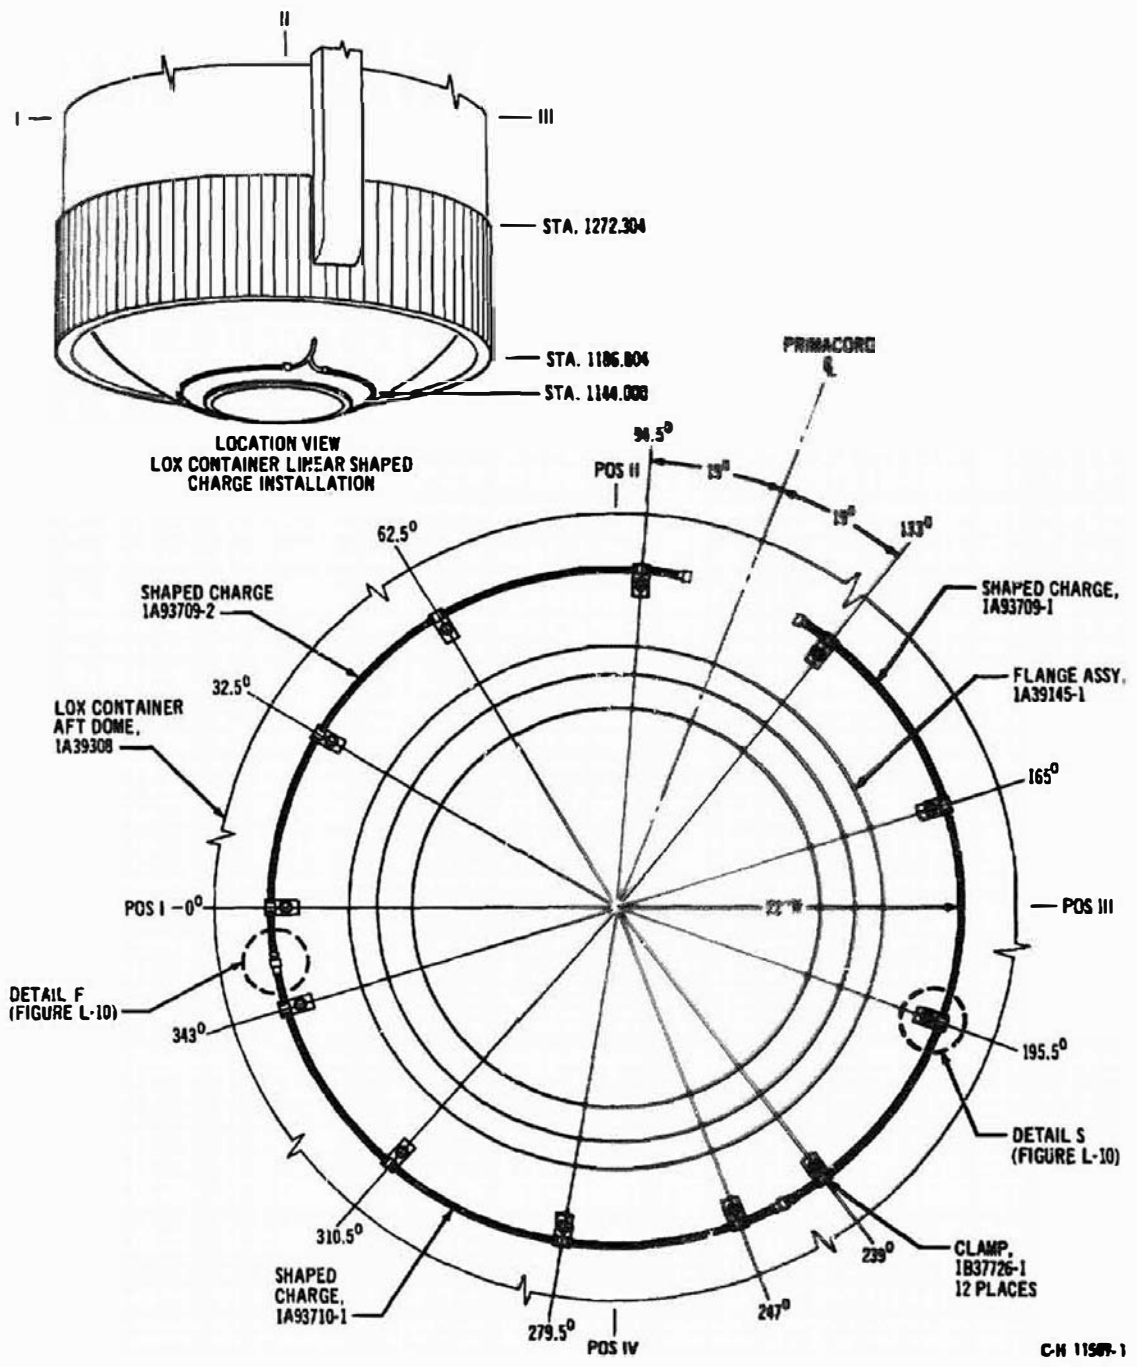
AFT DOME FUSE ASSEMBLY - INSTALLATION VIEW (Sheet 2 of 2)
